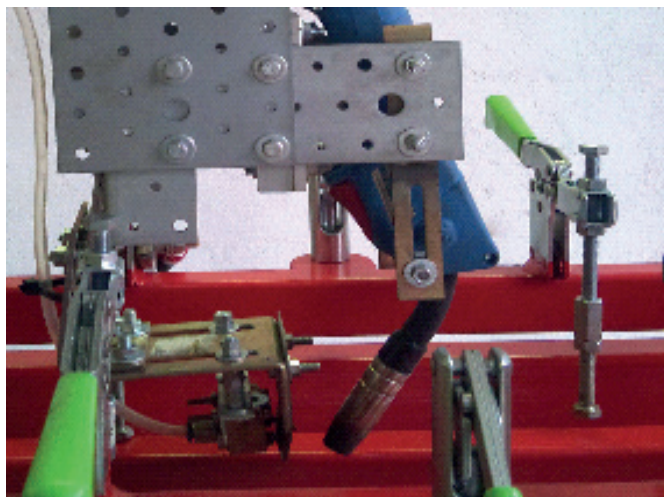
MIG welding head with micro-jet injector [11]
